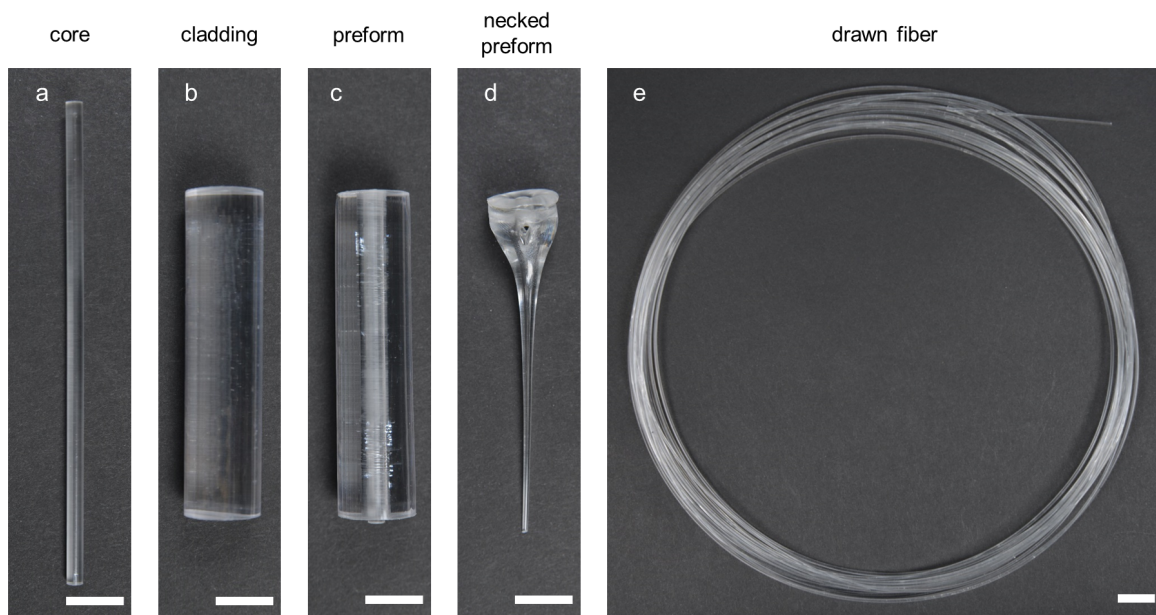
Photographs of the a) extruded PS core rod, b) extruded COP cladding rod, c) assembled preform, d) necked preform after the draw, and e) coil of drawn fiber.
